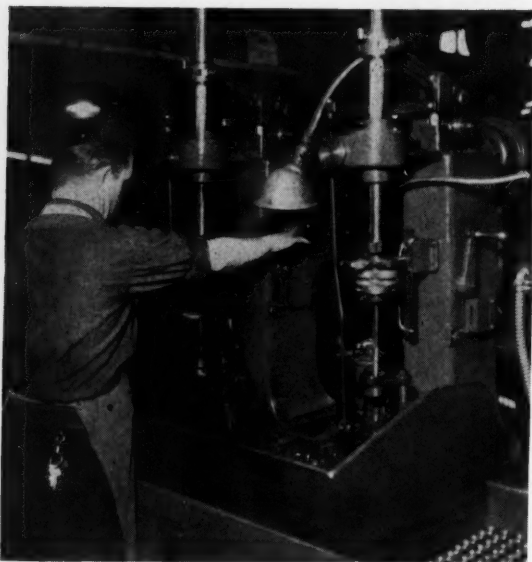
The crankpin bore in the compressor slide is honed to size in this two-spindle Hutto honing machine.
